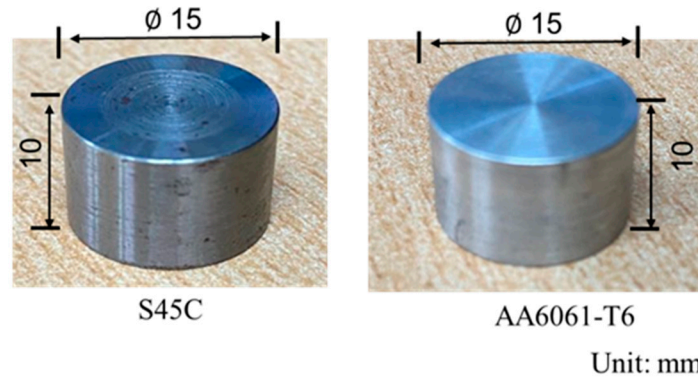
Cylindrical specimens of S45C and AA6061-t6 for EA-brazing joining.
